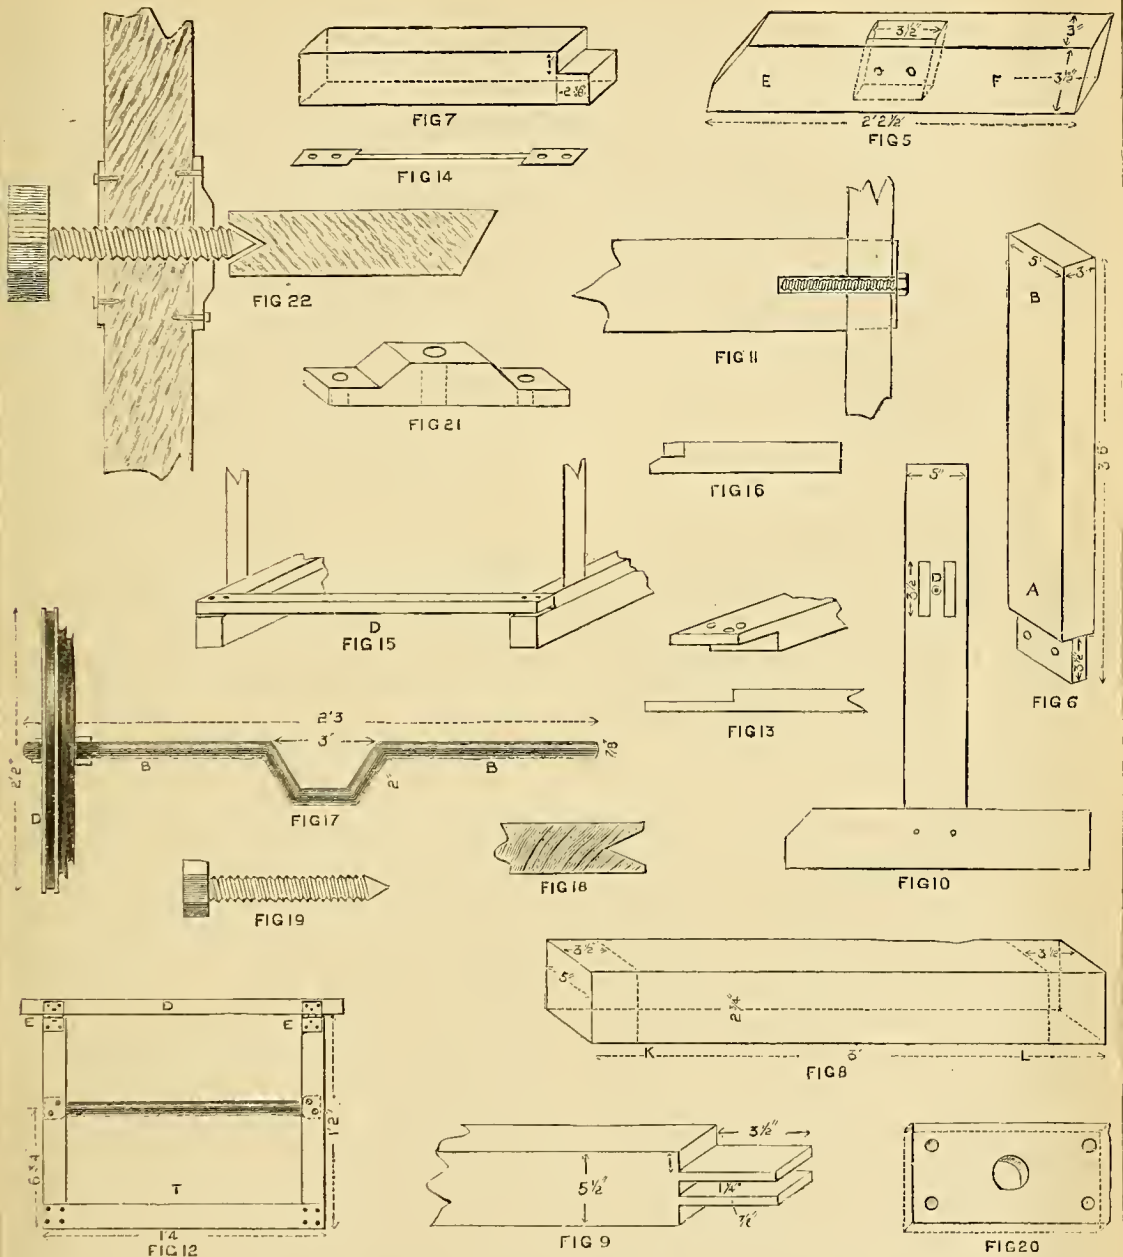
THE FOOT. FIG. 6.—UPRIGHT. FIG. 7.—FOOT SHOWING BACK END CUT DOWN SQUARE TO CARRY BAR FOR TREADLE. FIG. 8.—CROSS BEAM. FIG. 9.—END OF CROSS BAR, SHOWING DOUBLE TENON. FIG. 10.—SIDE VIEW OF UPRIGHT FIXED TO FOOT. FIG. 11.—CROSS SECTION OF UPRIGHT AND CROSS BEAM WITH PASSAGE AND BOLT. FIG. 12.—TREADLE ARRANGEMENT. FIG. 13.—JOINTING OF PARTS OF TREADLE FRAME. FIG. 14.—IRON BAR TO CARRY CONNECTING ROD BETWEEN TREADLE AND CRANK. FIG. 15.—STRIP ACROSS FEET TO WHICH TREADLE IS HINGED. FIG. 16.—BEVELLING OF END OF FOOT PROJECTING BEYOND FOOT. FIG. 17.—FLYWHEEL AND CRANK. FIG. 18.—SECTION OF ONE END OF AXLE DRILLED IN CONICALLY TO CARRY POINT OF BOLT ON WHICH AXLE RUNS. FIG. 19.—HALF INCH BOLT FOR HANGING CRANK AXLE AND WHEEL. FIG. 20.—IRON PLATE TAPPED WITH THREAD TO TAKE BOLT. FIG. 21.—BOLT PLATE FOR INSIDE FACE OF UPRIGHT. FIG. 22.—SECTION OF UPRIGHT AND AXLE WITH BOLT AND PLATES IN POSITION.
